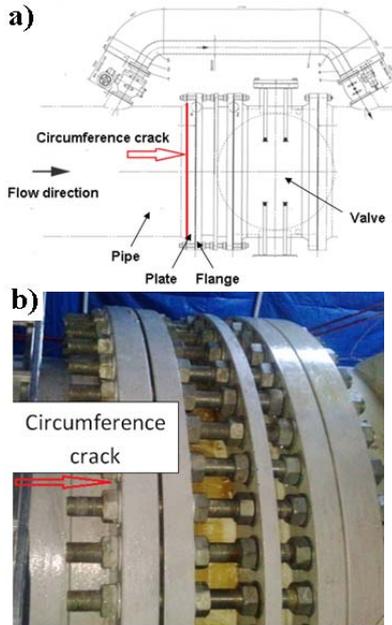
General view of the flange-plate-pipe system and circumference crack
